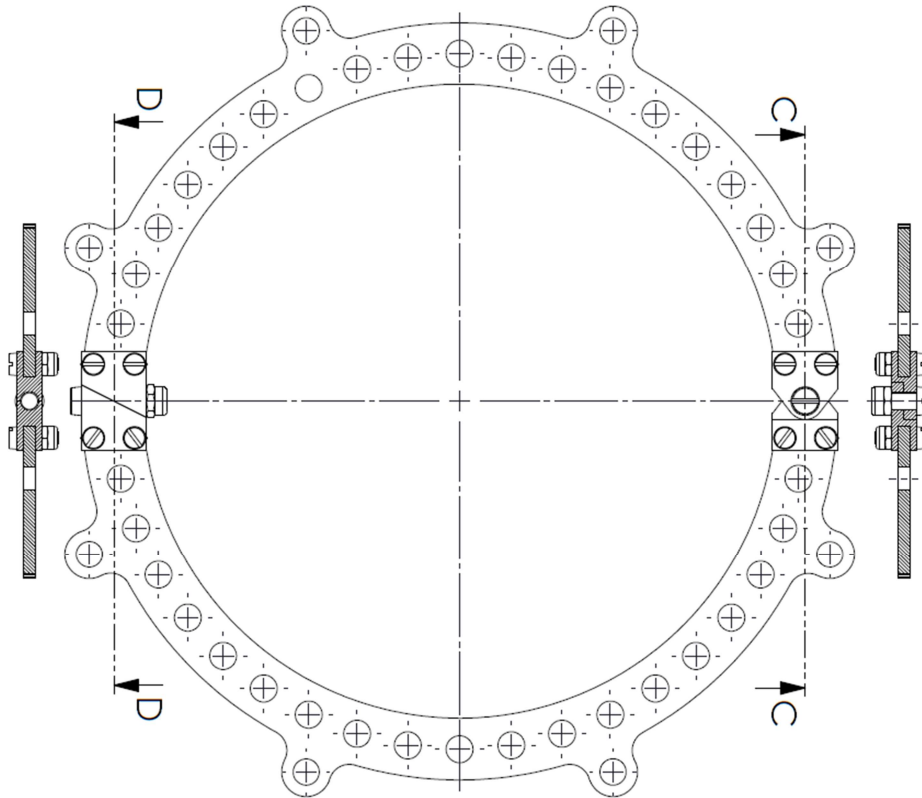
An image demonstrating the fully assembled fixator ring (segmented half rings with hinge-and-lock systems) as per the generated engineering drawings created using the Solidworks Software (Ref: Engineering Drawings in Appendix D)
